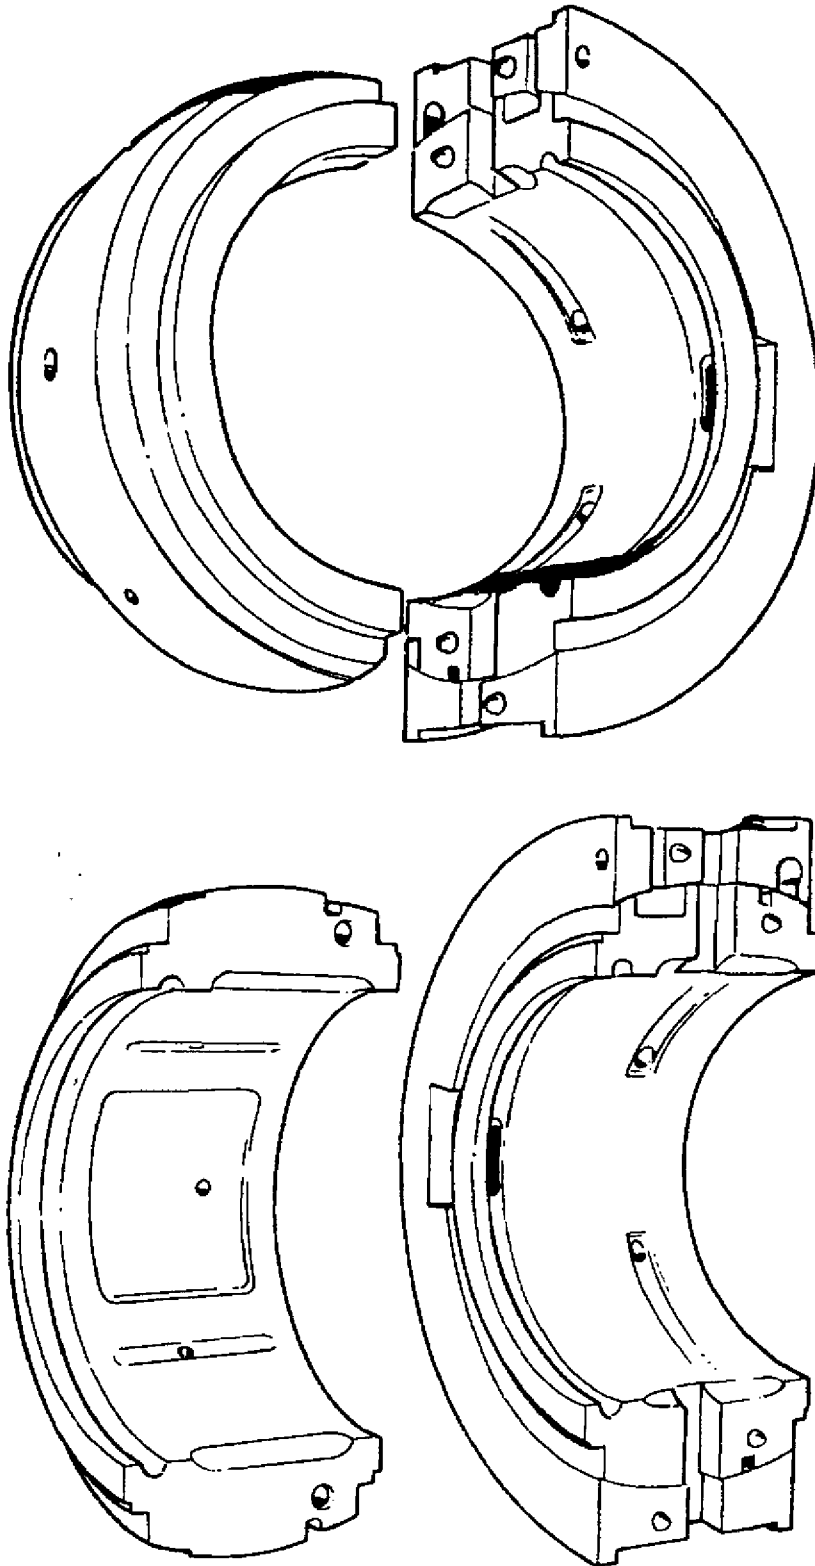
Spherically Seated Bearing in a Cylindrically Seated Bushing
